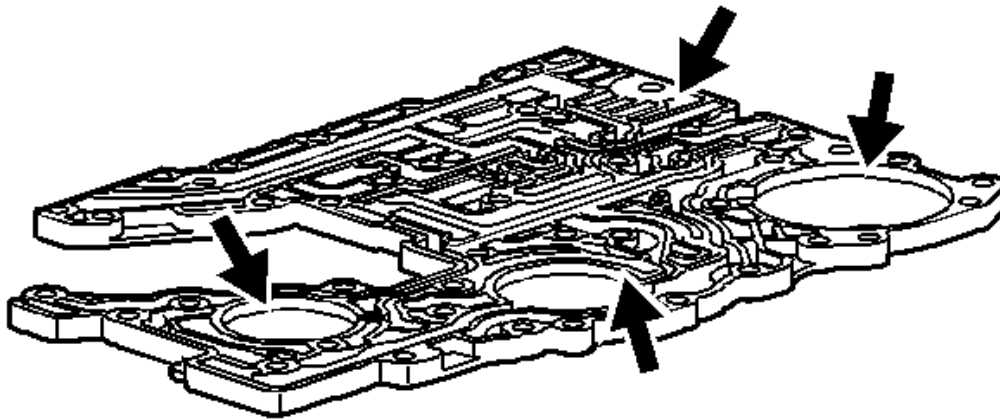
Locating Lower Channel Plate Accumulator Bores & Mating Surfaces
